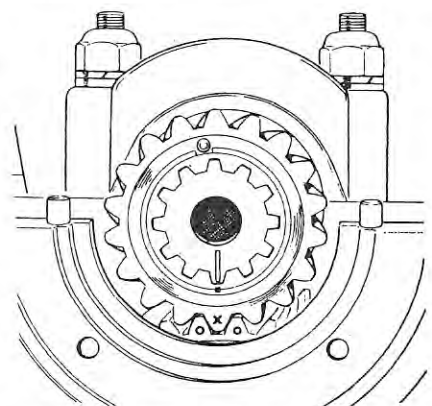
Crankshaft must be correctly timed to tower shaft gear as shown, during installation of crankshaft.
